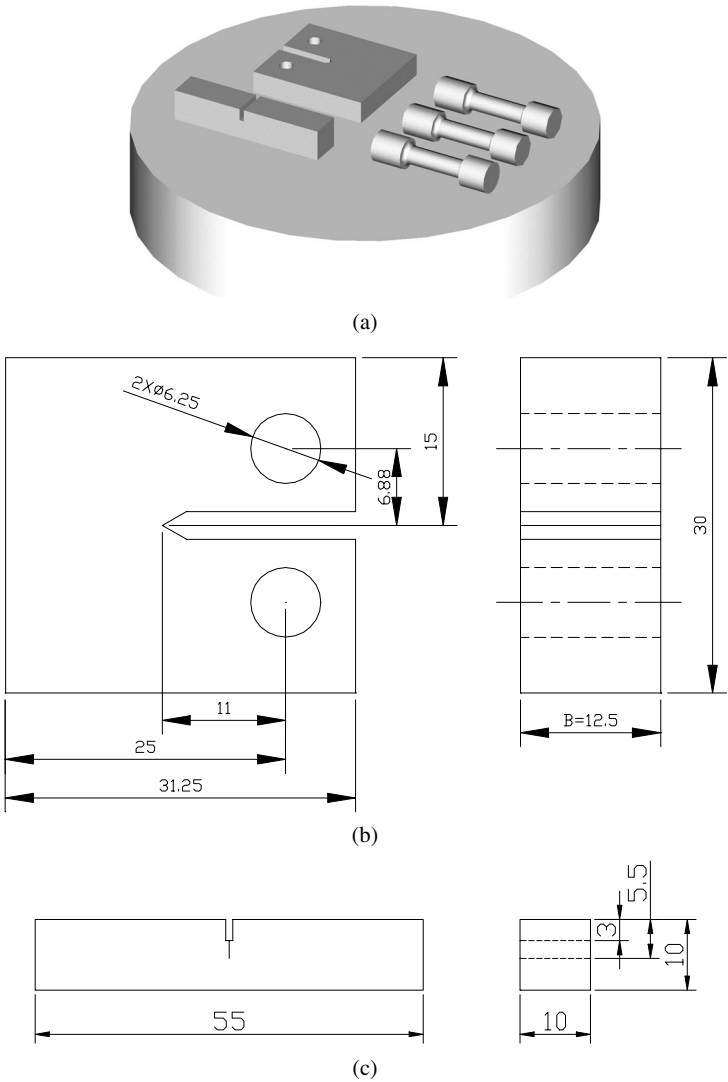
Orientation from cast ingot and dimension of fracture toughness test specimen. (a) Specimen orientation from cast ingot; (b) static fracture toughness test specimen; (c) dynamic fracture toughness test specimen.
